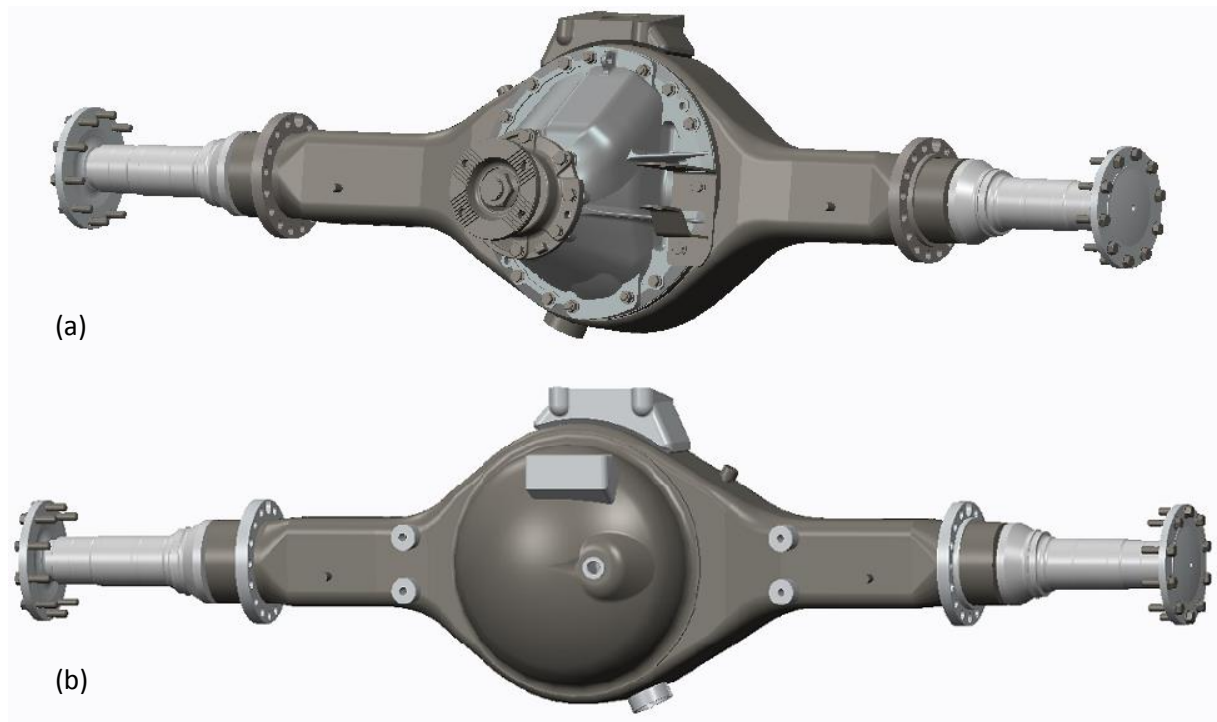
3D-model of axle housing from (a) drive head side and (b) oil sump side
